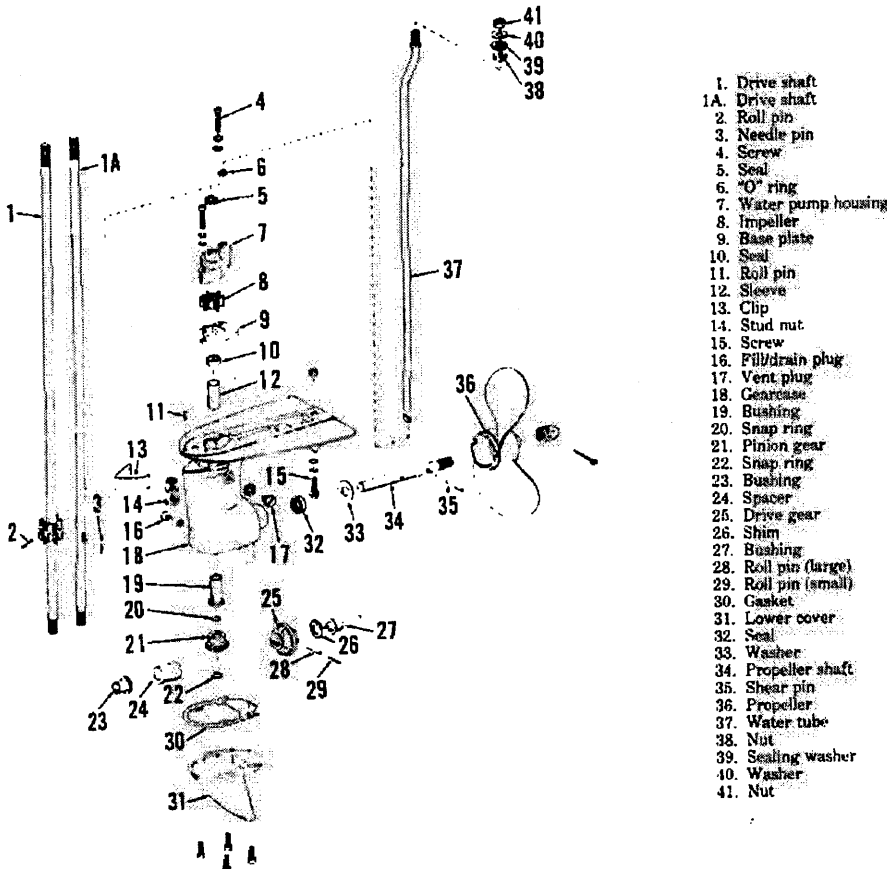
Exploded view of typical, nongear shift, lower unit. Note that water pump impeller may be driven with a needle (3) or a roll pin (2). Water tube (37) extends through exhaust opening on motors without water pump.
